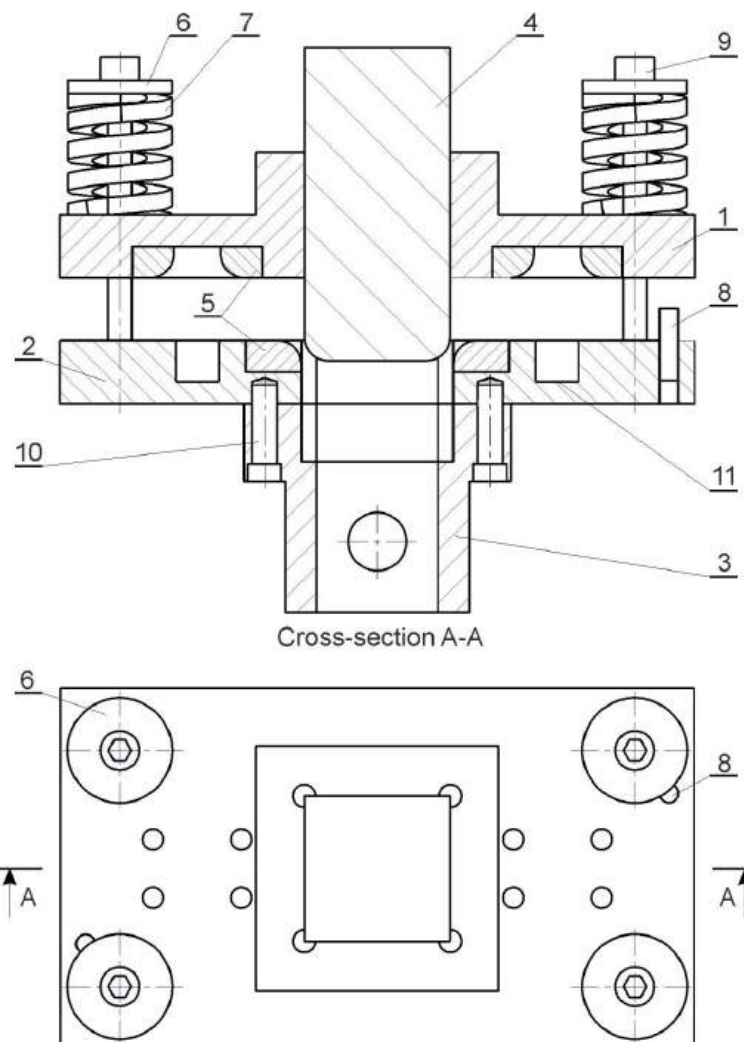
Stamping die: 1 – blankholder; 2 – die; 3 – holder; 4 – punch; 5 – inserts; 6 – washer; 7 – spring; 8 – locating pin; 9, 10 – screws; 11 – draw bead socket.
